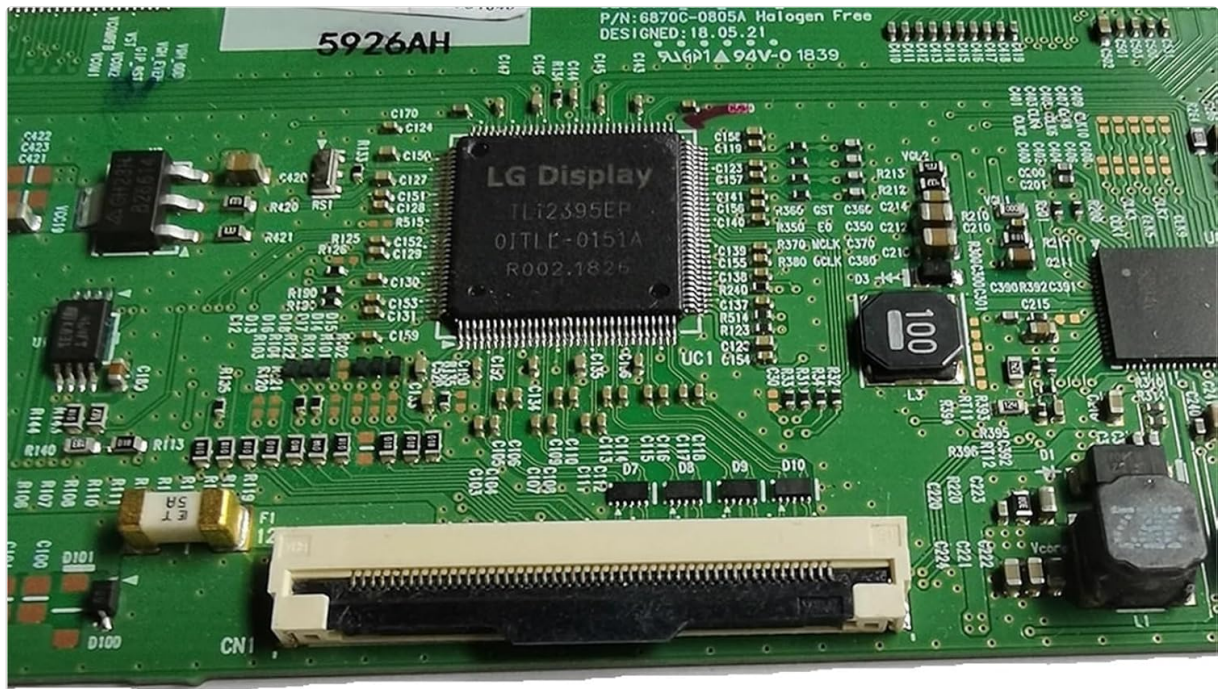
An angled perspective of the 6870C-0805A T-CON board, providing a clearer view of the various connectors for ribbon cables and the general arrangement of surface-mounted components. This angle can assist in proper cable alignment.
